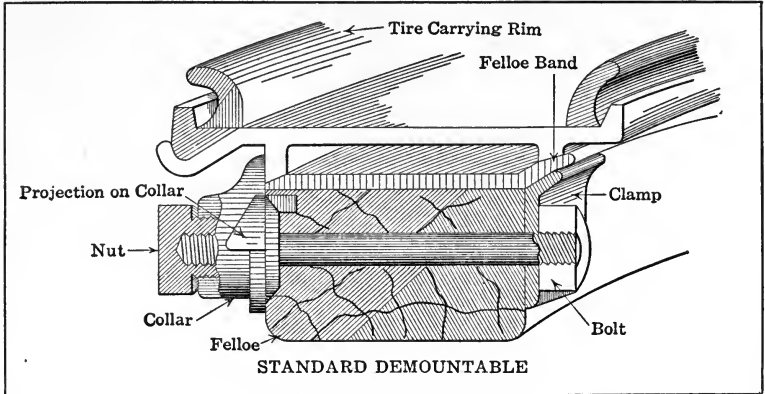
Quick-Detachable Rim of the Demountable Form.
